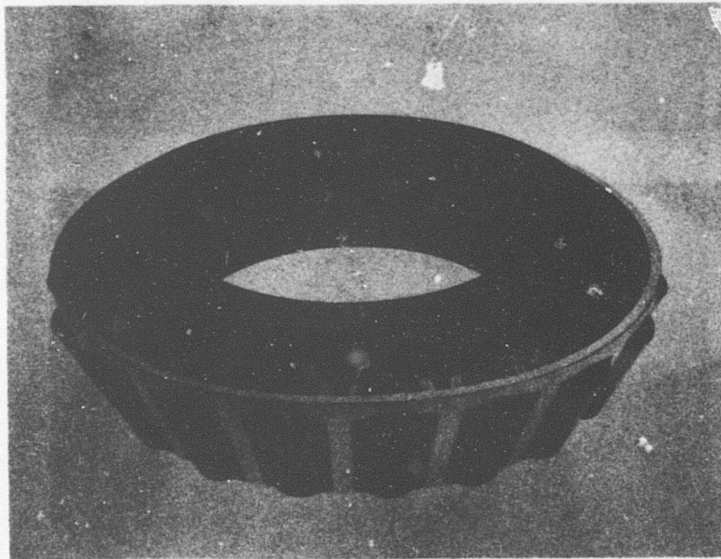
HM926700-Series Bearing After Test, Bearing No. 73-8, Test No. 33--Damaged While Accelerating to 9000 rpm.
